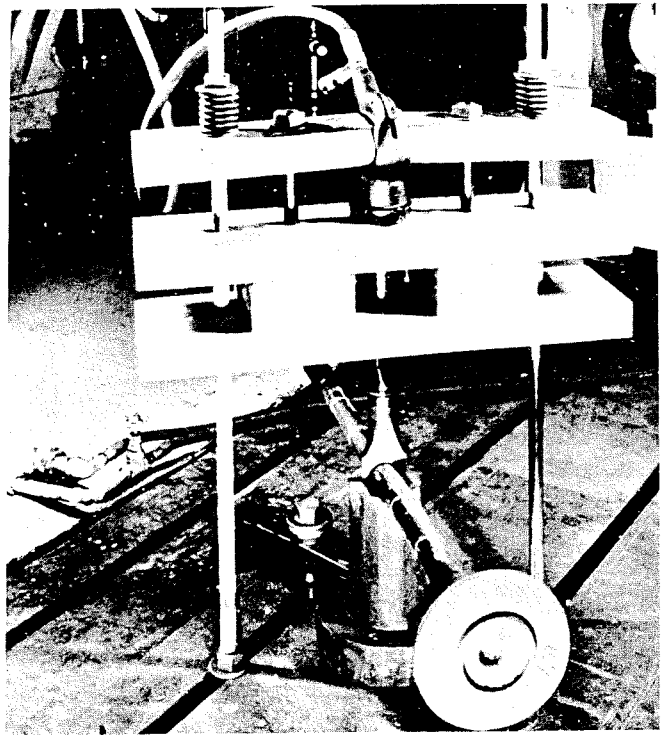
Setup for hammer straightening of axle shafts after heat treatment.
